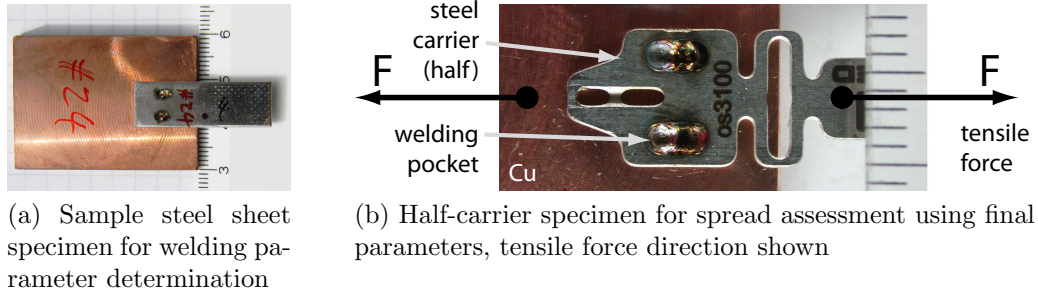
Two types of welding specimen used for tensile tests (scales in mm)
